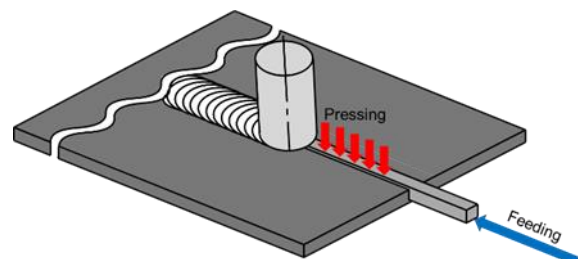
Schematic diagram of build-up friction stir welding.
